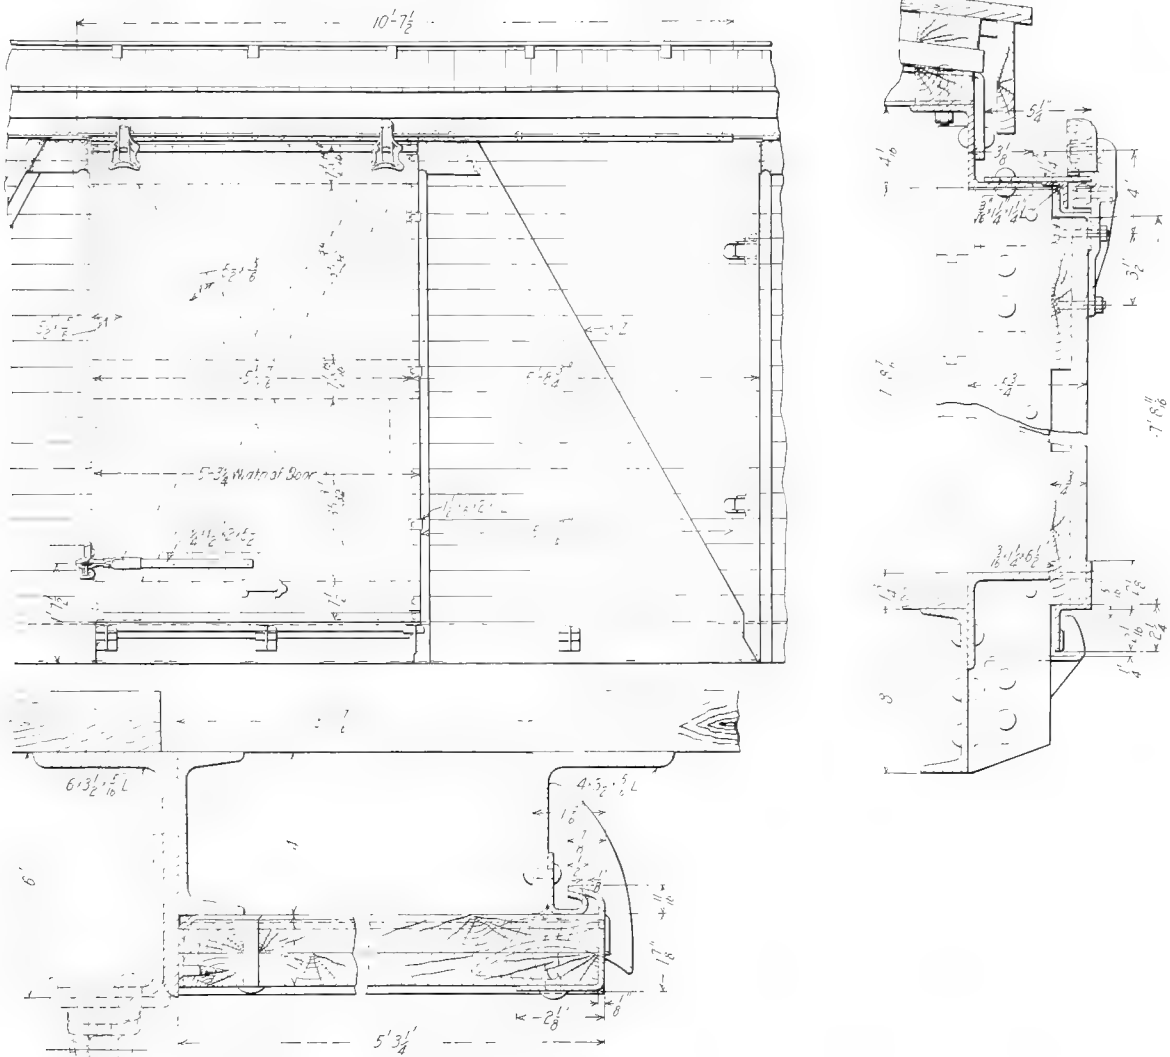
Camel Side Door No. 30 for Steel Superstructure Box Cars. The Camel Company.
